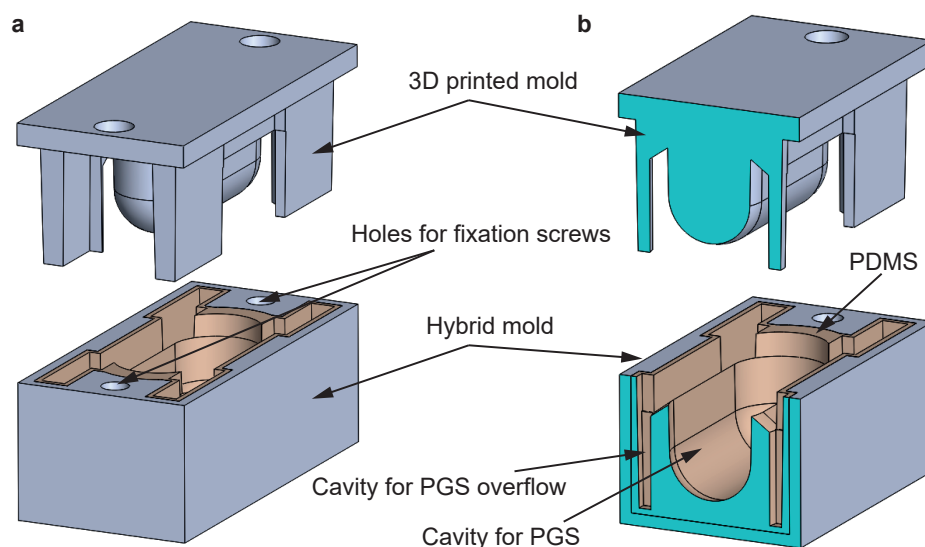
Bottom mold fabrication. a,b, Production of the bottom hybrid 3D printed-PDMS micro-mold for the molding of PGS and POMaC. 3D printed molds filled with PDMS after the opening of the molds (a) and cross-section showing the cavity to mold PGS as well as the cavity for the PGS overflow (b).
